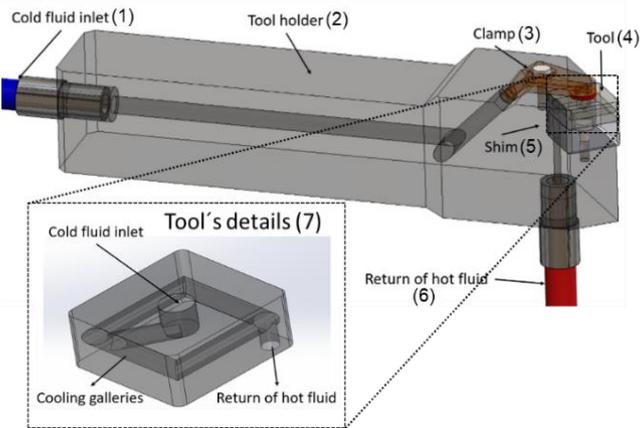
Internally Cooled Tools – ICT design in detail showing cooling channels.
